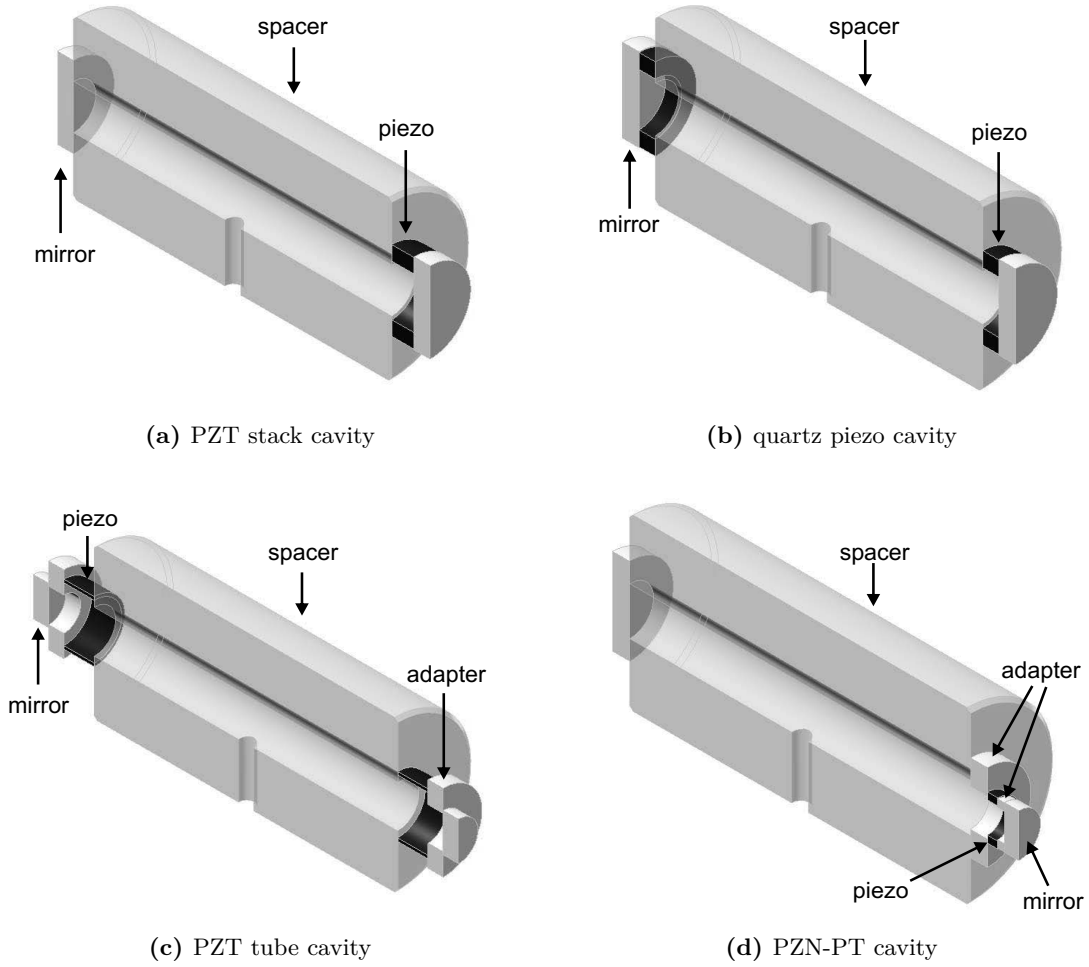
Details on the assembly of the piezo-tunable cavities, cross-sectional view. The piezo actuator is always depicted in black.
